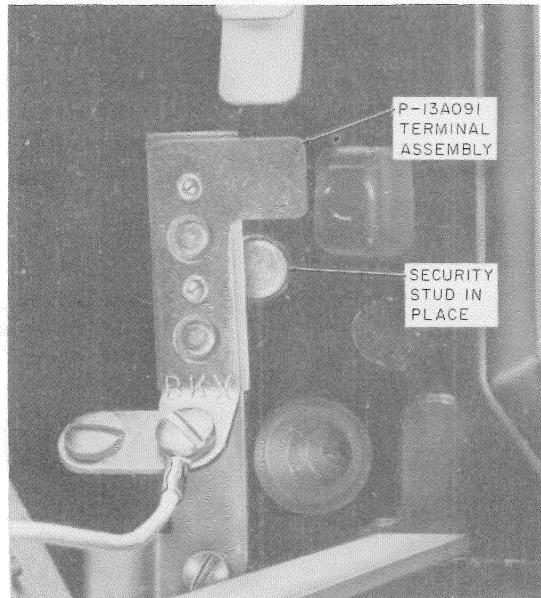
P-13A091 Terminal Assembly with Security Stud Installed
